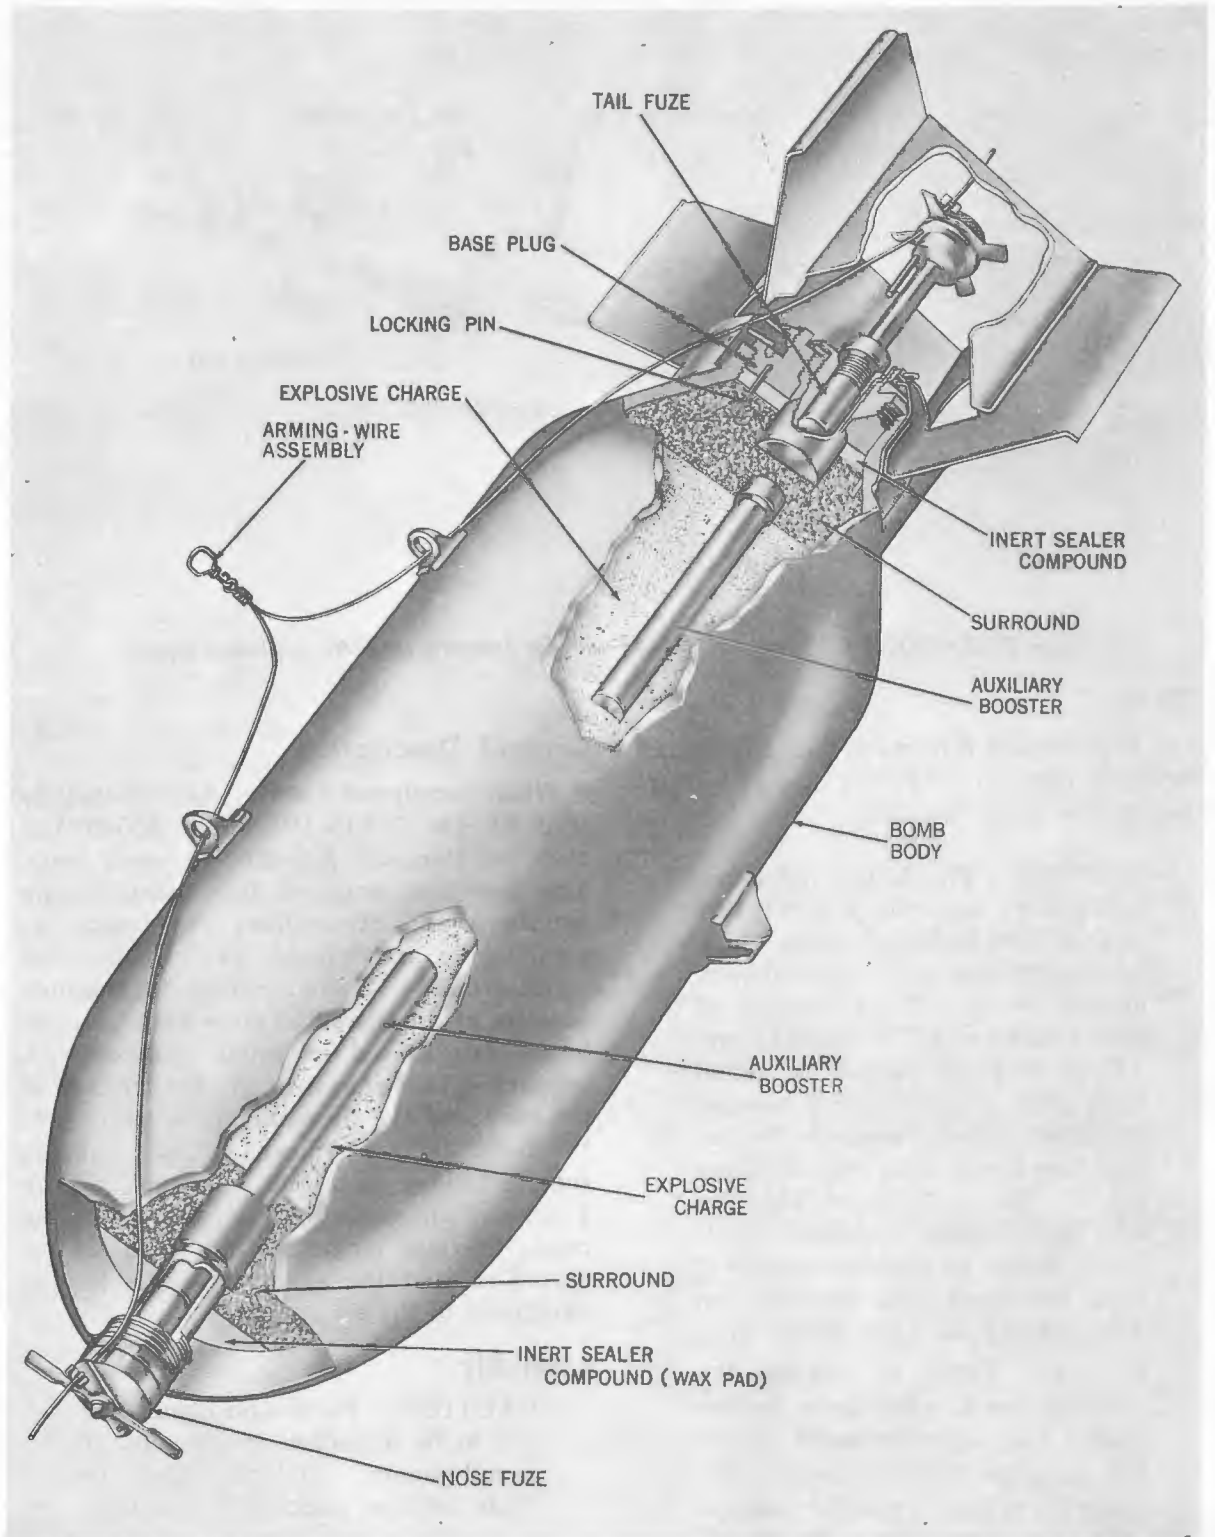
500-lb GP Bomb AN-M64A1 with Fin Assembly AN-M109A1, Cutaway View.
